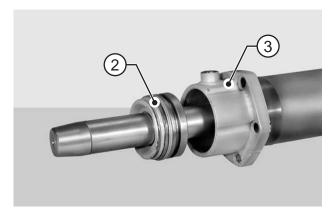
Grease the seals of the head (2), slip the head onto the piston and, using a plastic hammer, introduce head into cylinder (3).
